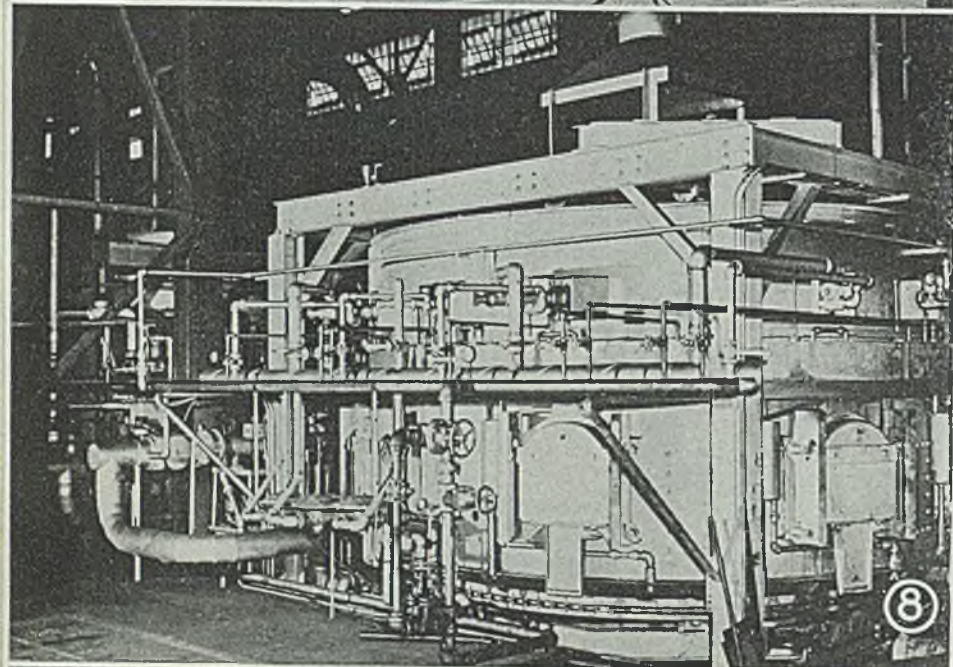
Close up of one of typical 8-hole rotary furnaces that are used for coining and other operations
